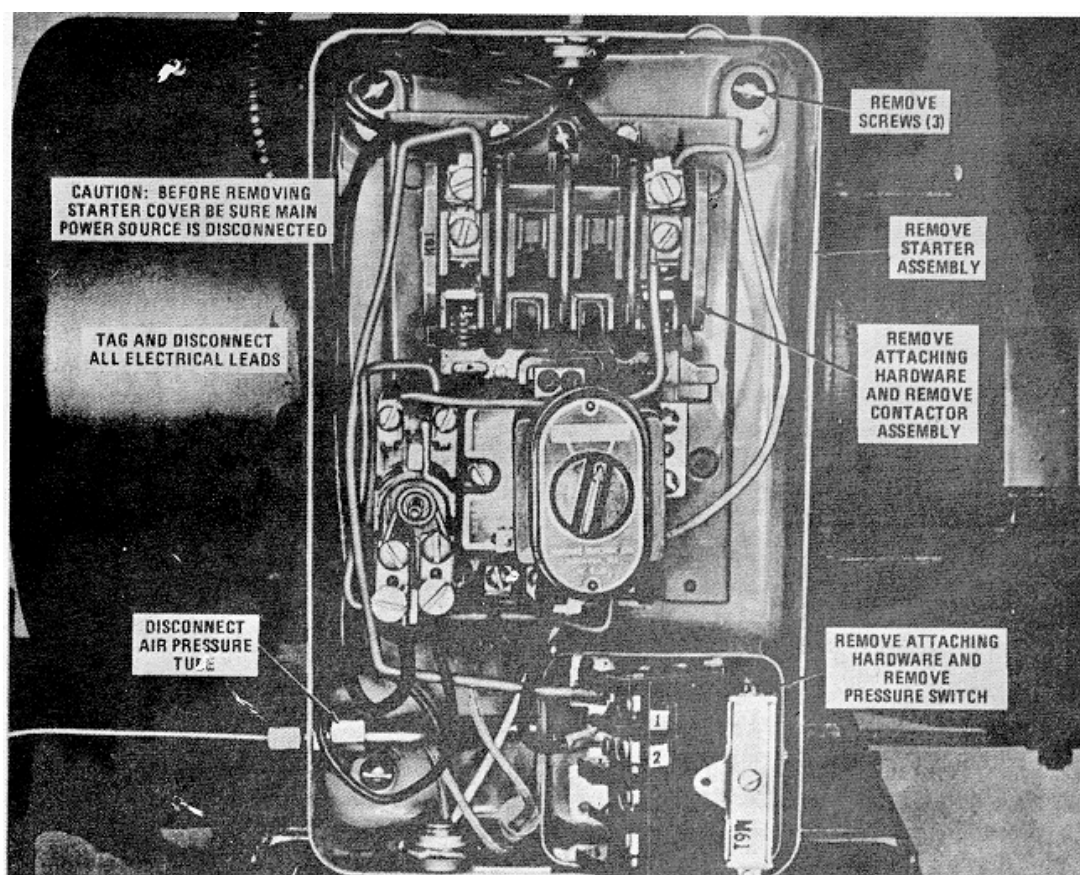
Magnetic starter with pressure switch, removal and installation (shown with cover removed)
